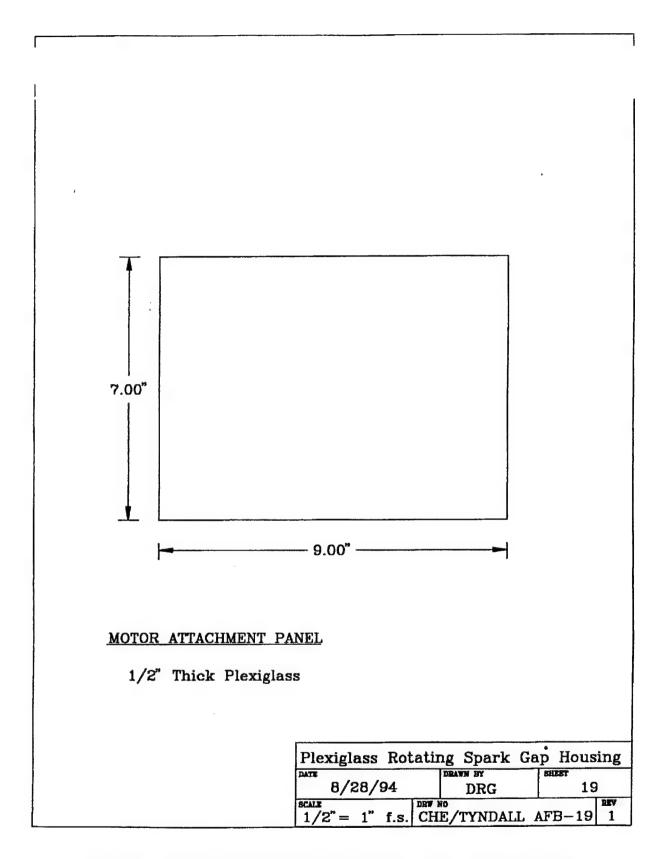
Plexiglas Rotating Spark Gap Housing - Motor Attachment Panel
